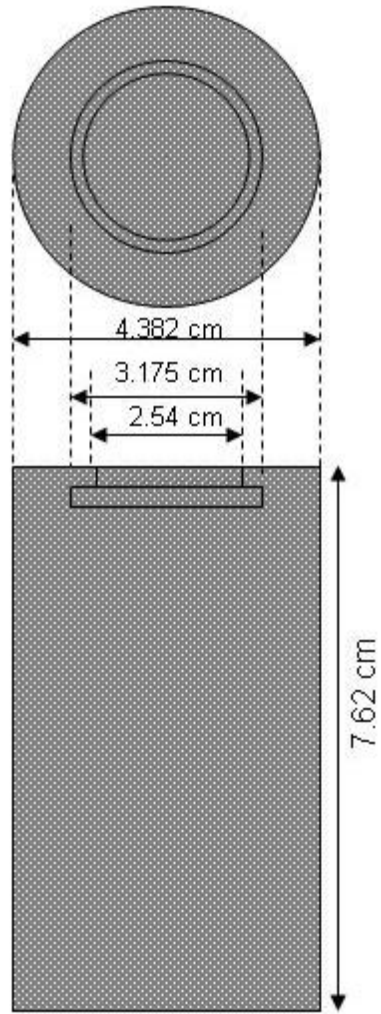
Radial (above) and Axial (below) View of the Beryllium Plug. [1] The beryllium plug is inserted into a hollow beryllium type reflector assembly to form the solid beryllium type reflector assembly.
